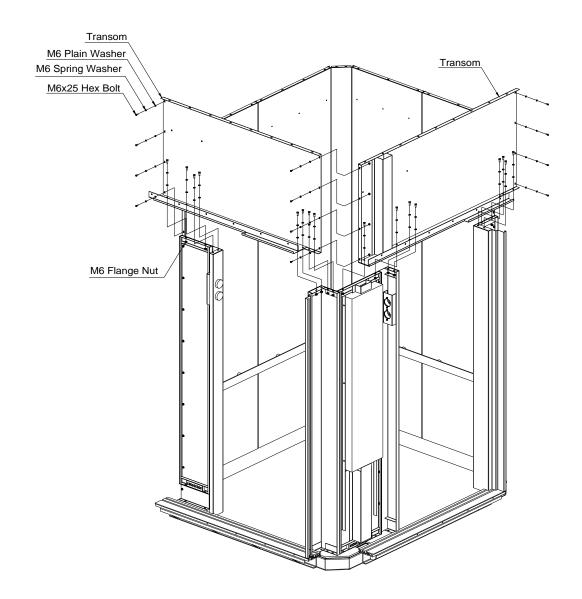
F. TRANSOM ASSEMBLY (CORNER POST)
